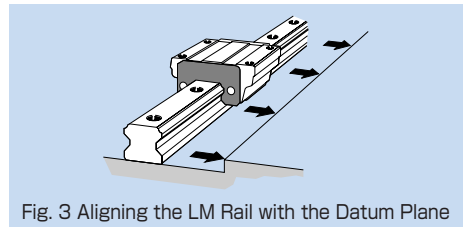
Aligning the LM Rail with the Datum Plane
